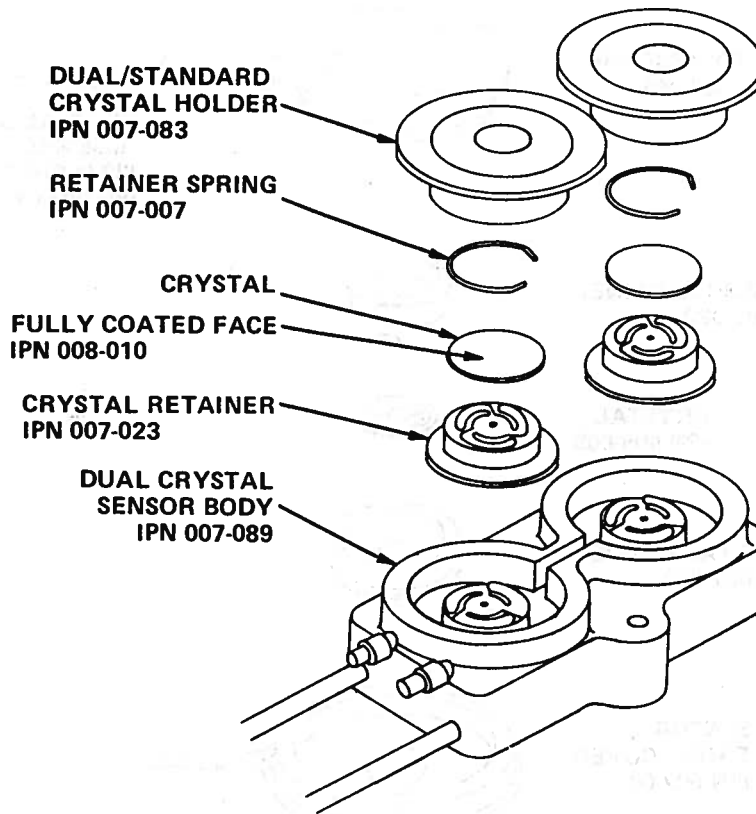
Dual Crystal Sensor (Exploded View)
